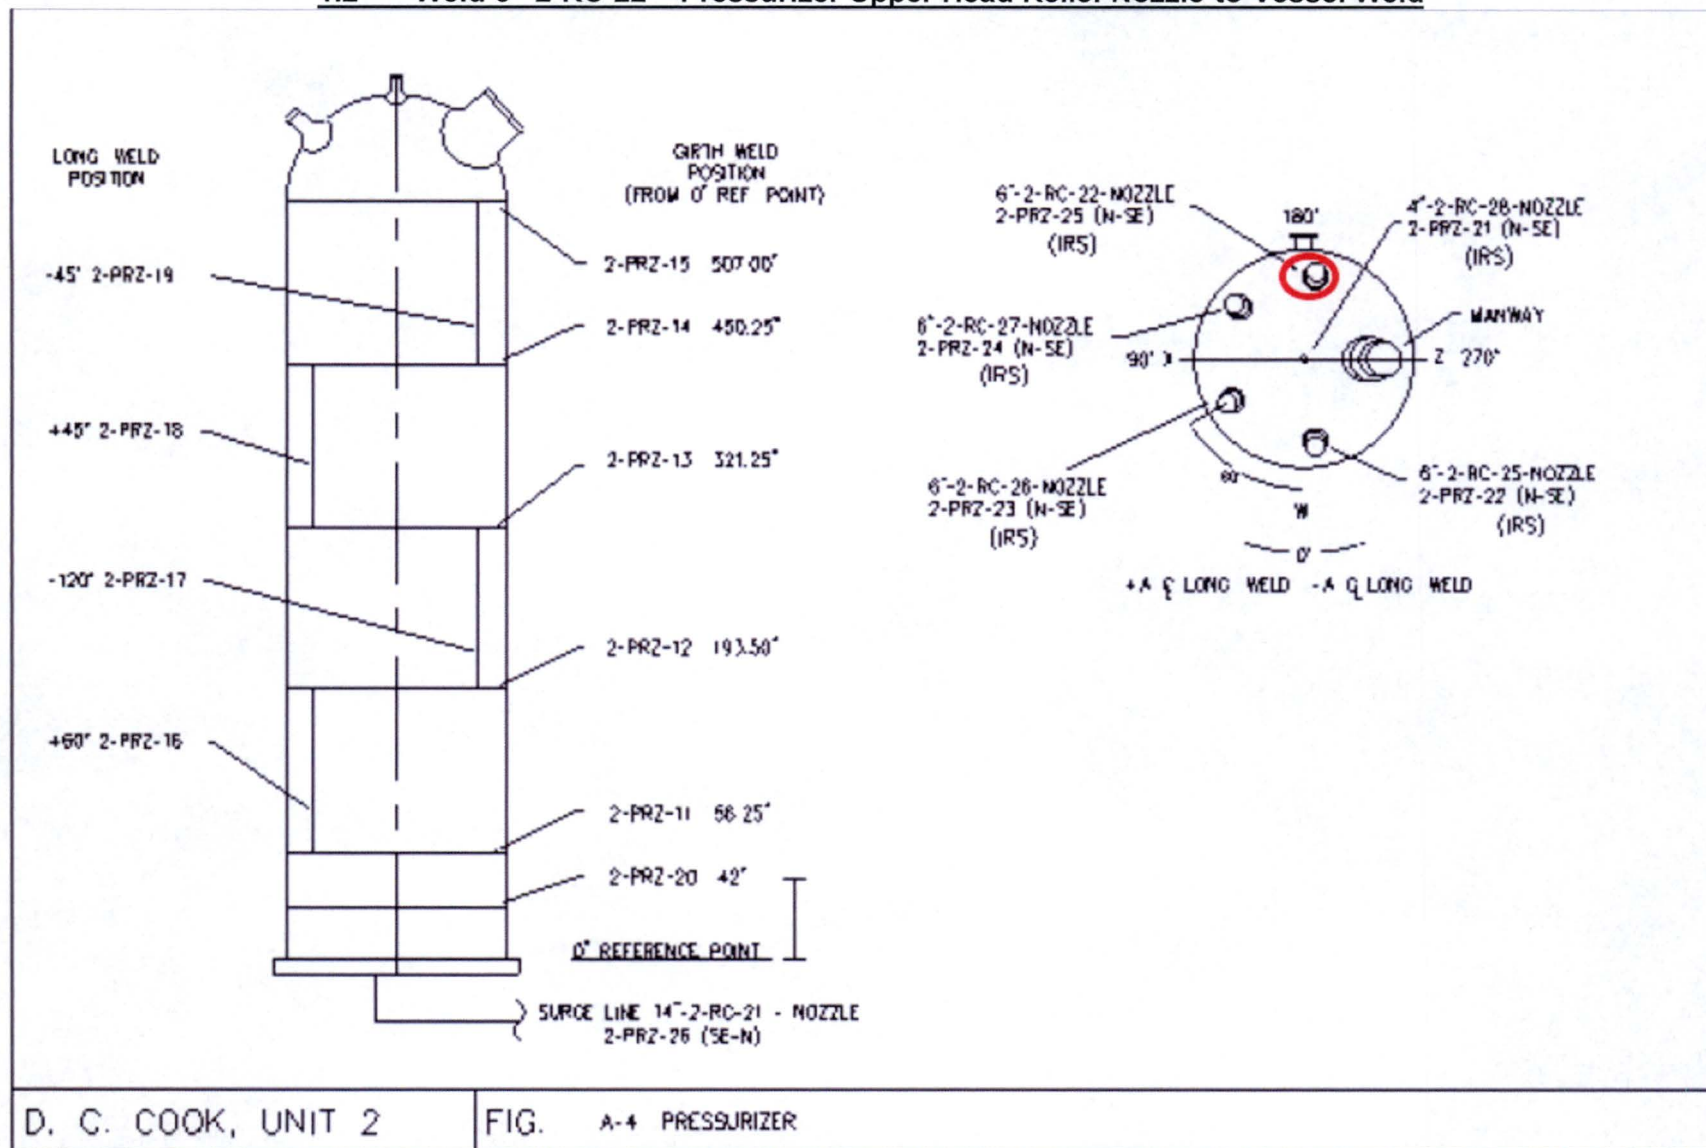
Weld 6"-2-RC-22 (Extracted from Reference DRAWING 2A-4)
